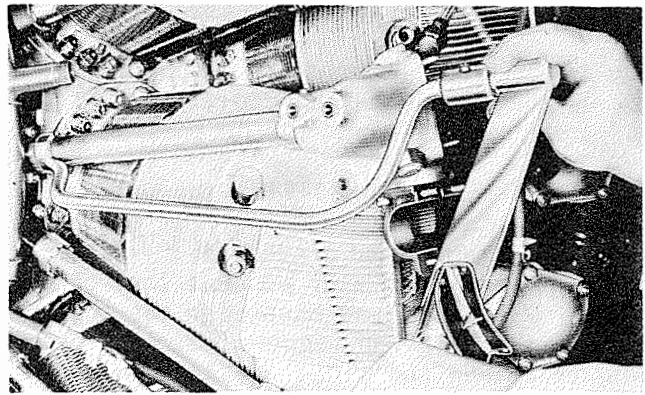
Torquing Push Rod Housing Nut at Adapter
